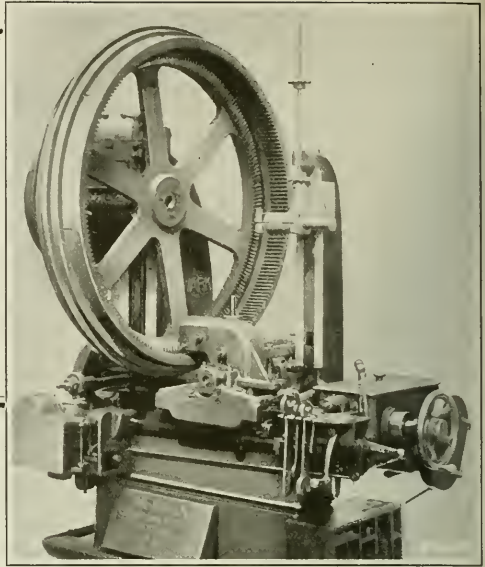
Cutting an Internal Gear on a Machine equipped with an Internal Attachment
